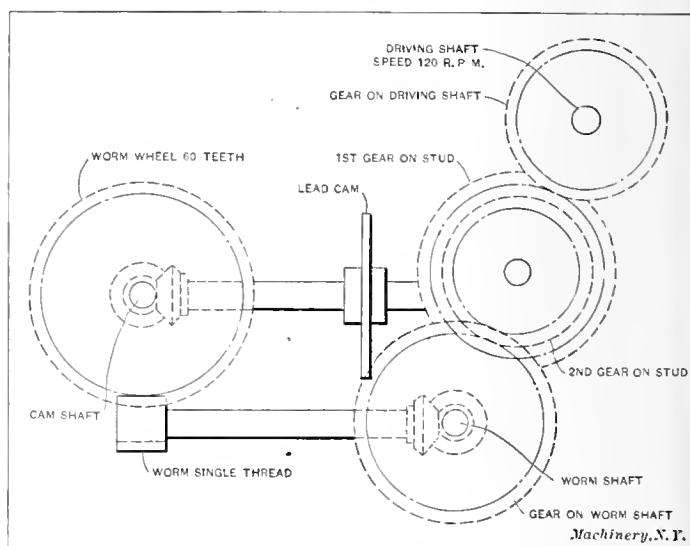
Diagram of Gearing on the No. 2 Brown & Sharpe Automatic Screw Machine
